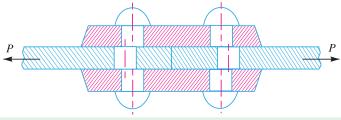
Shearing off a rivet in double cover butt joint.
